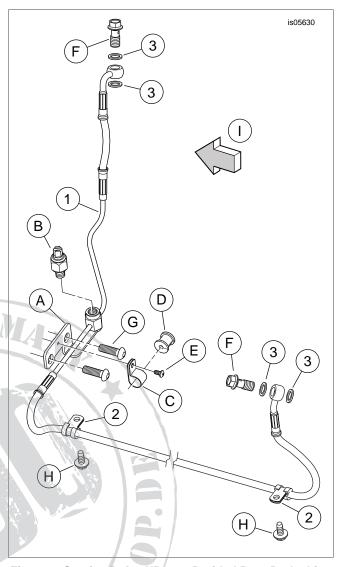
Service Parts, XR1200 Braided Rear Brake Line Kit
